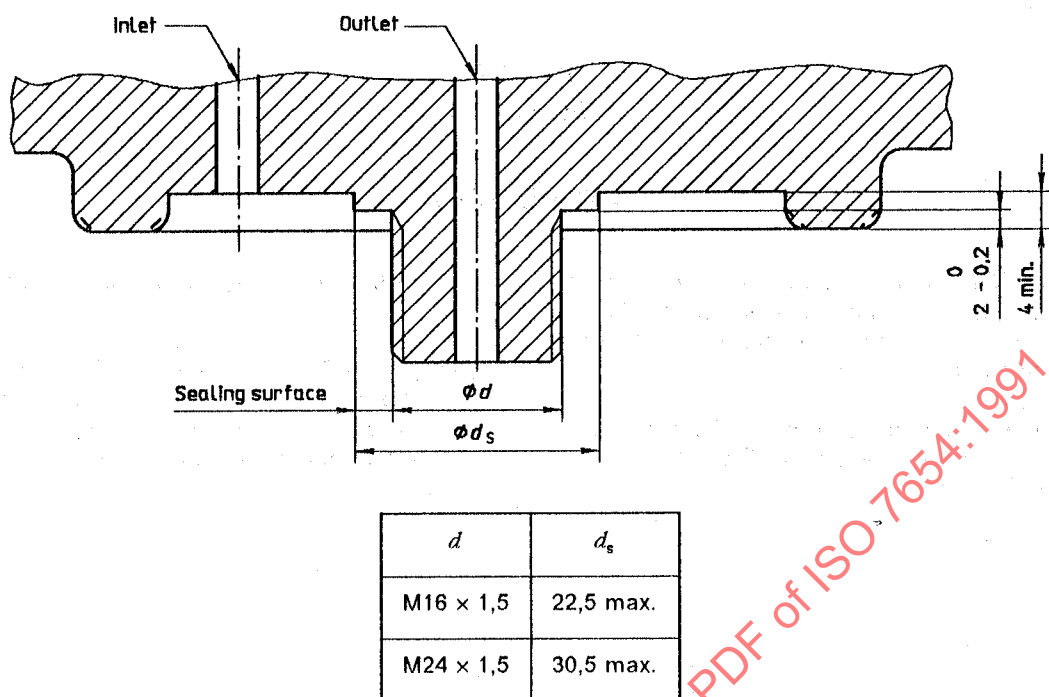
Dimensions of sealing surface and connecting thread with inner sealing
